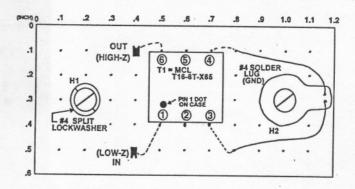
MWT-3 REGEN. TÜNER / CONTROLLER (SWITCH DETAILS: SKETCH OF INTERIOR VIEW OF COMPONENTS, BOTTOM COVER REMOVED)
